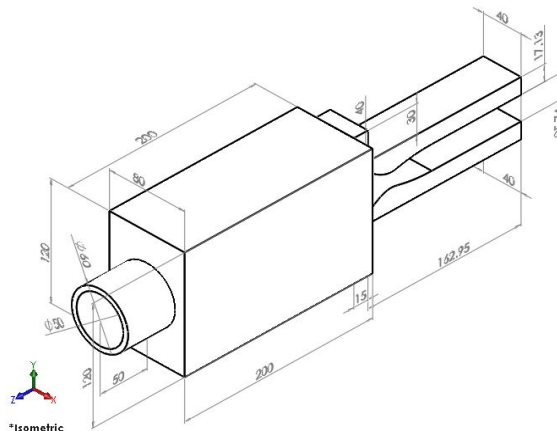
Isometric View of the block and the nozzle. (Dimensions in mm) [10]
